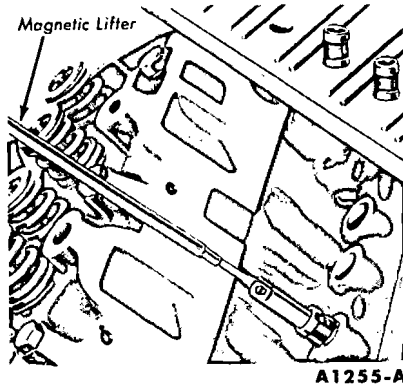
Valve Lifter or Tappet Removal—Intake Manifold Removed
